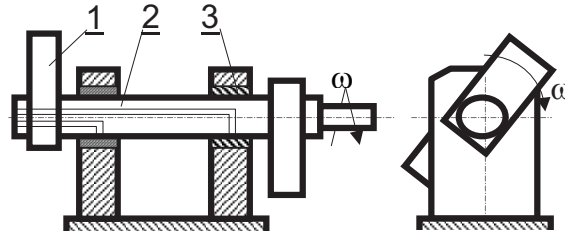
The MWO-stand operational principle, 1 - unbalanced mass, 2 – testing shaft, 3 – tested bearing
